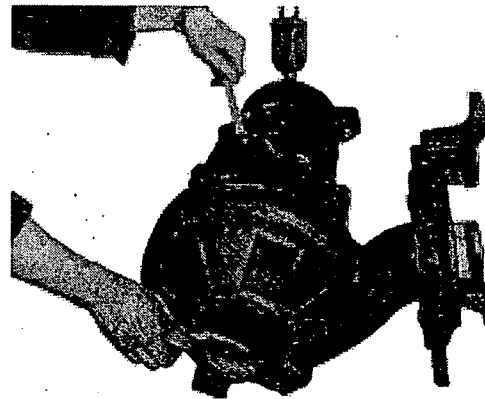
Setting impeller clearance using the set screws and feeler gages.
